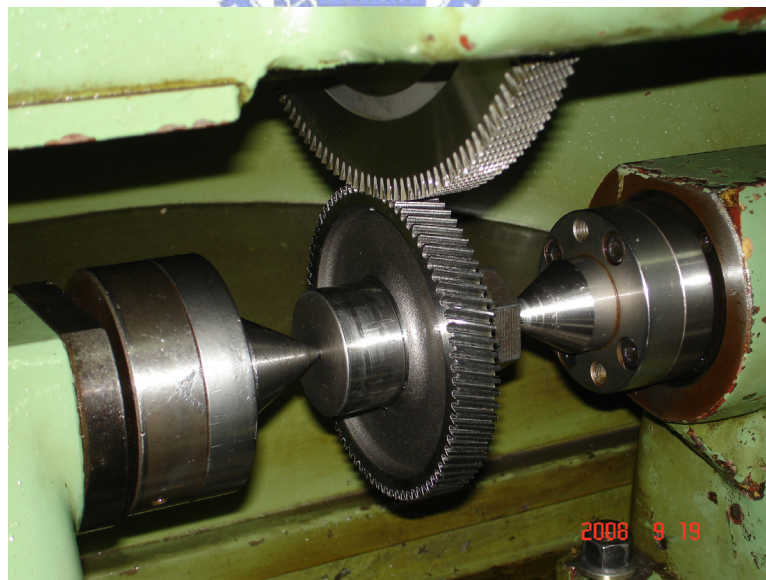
Plunge shaving cutter ground by the grinding wheel of the re-sharpening machine.
